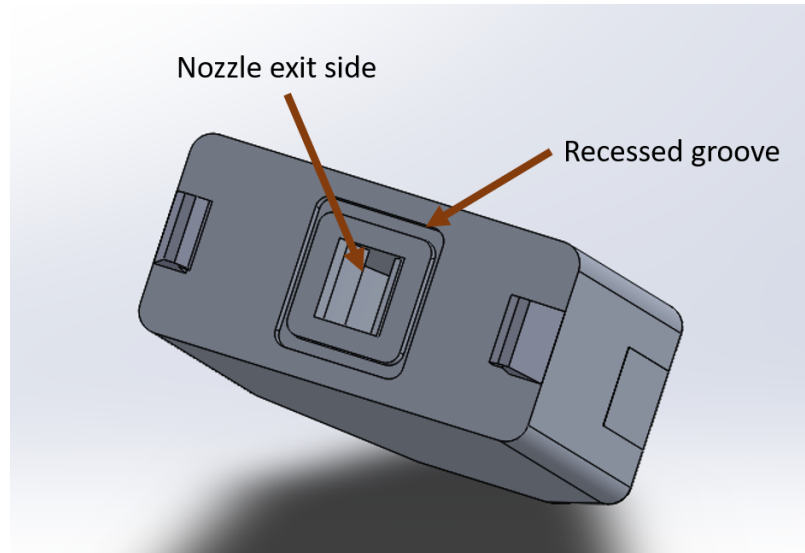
Internal Design: Actuator top surface with sealant groove shown
